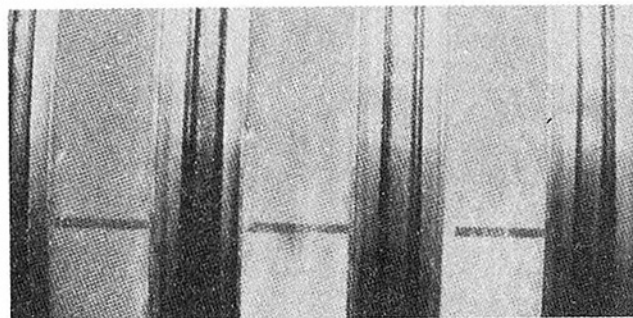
Closeup view of RC-1 coated Mars 10,000 hp engine compressor rotor indicating lines of potential rubbing
